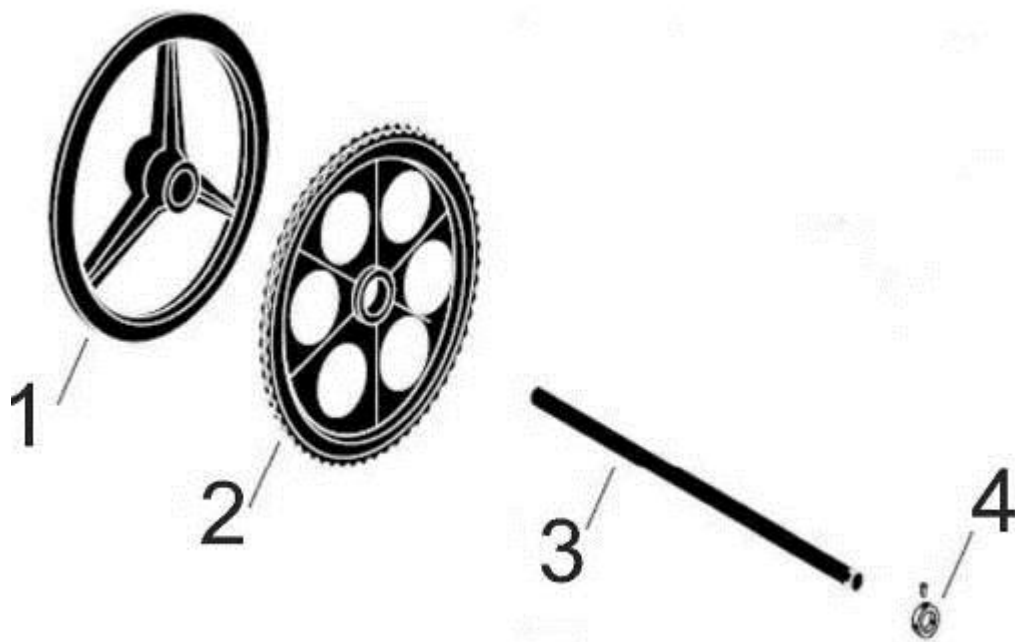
Elements of the working section on the roller MCB/MCW: 1 - plain wheel, 2 - gear wheel, 3 - roller axle, 4 - lock ring.
